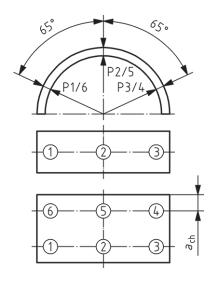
Three- or six-point measuring scheme for half-bearings (Method A)
